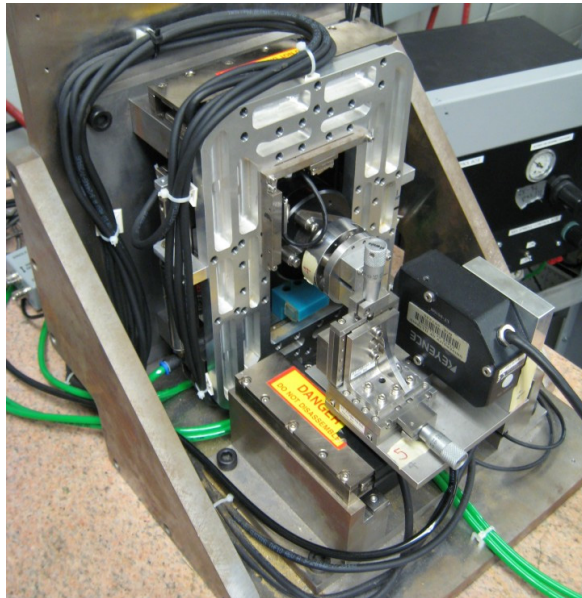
5-axis mMT with groove cutting assembly attached
